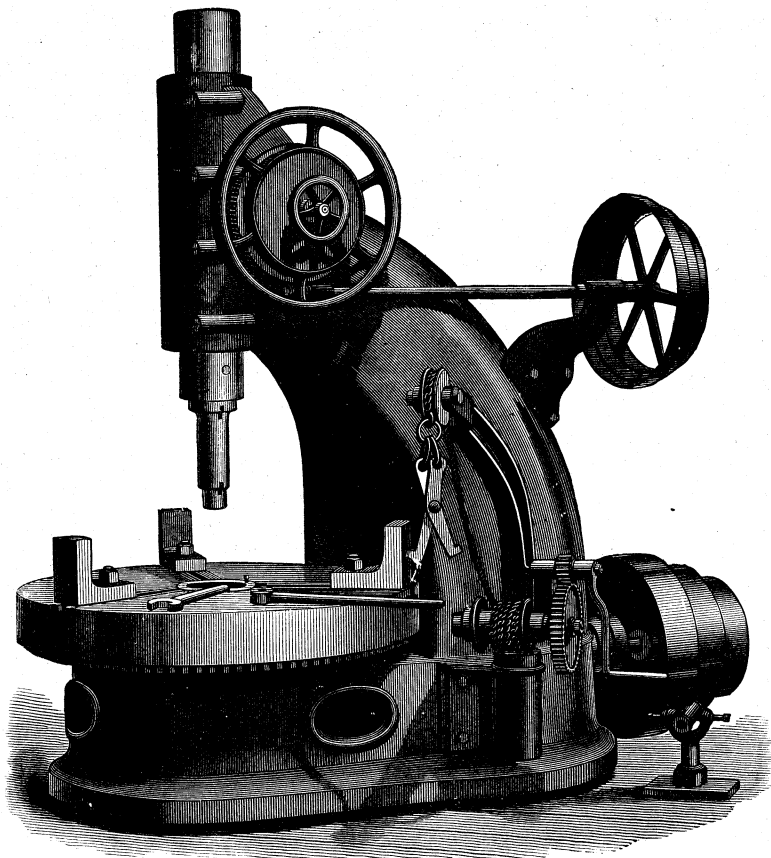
CAR-WHEEL BORING MACHINE.
